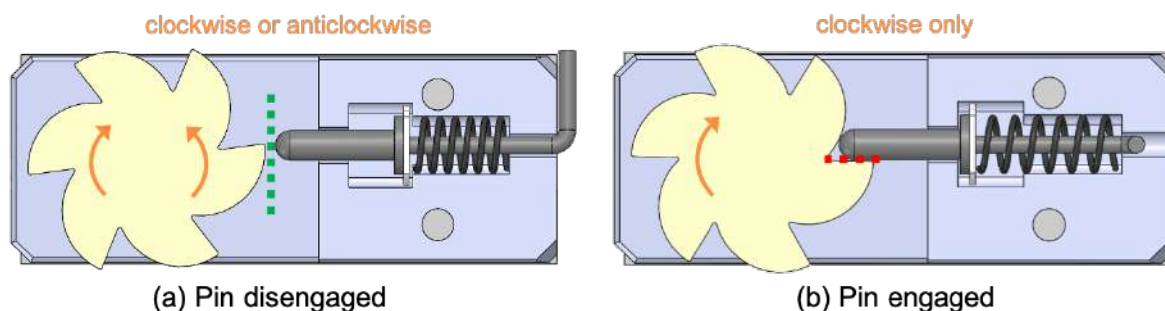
Functional principle of the spring-loaded bolt-locking mechanism.
